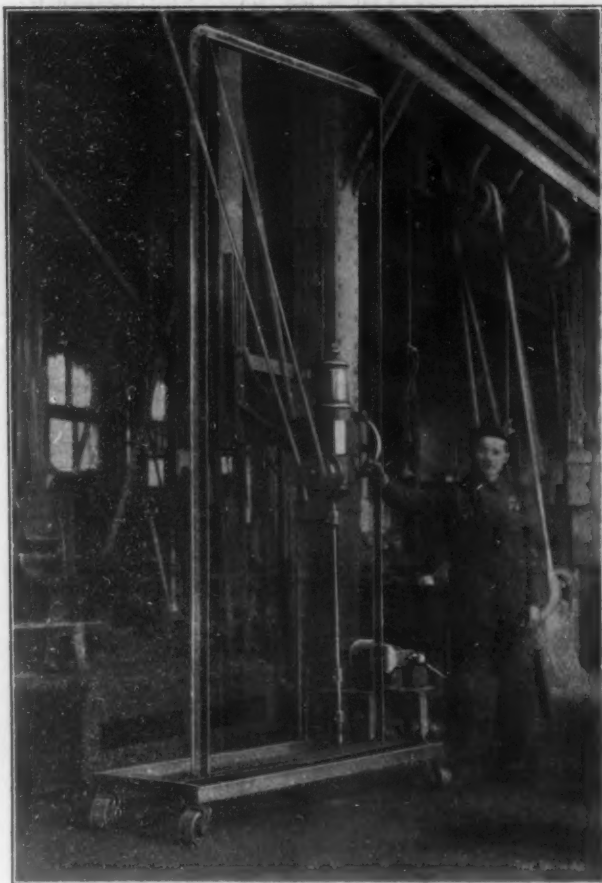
Combined Steel Truck and Work Table for Holding Pieces for Machinery.—Vise Mounted on End of Truck.
